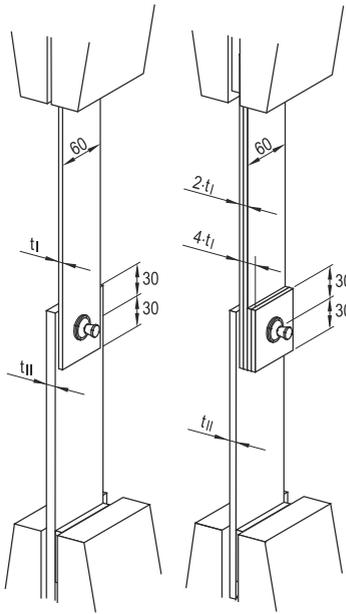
Shear test specimens for testing single layer and 4 layers of sheet metal
